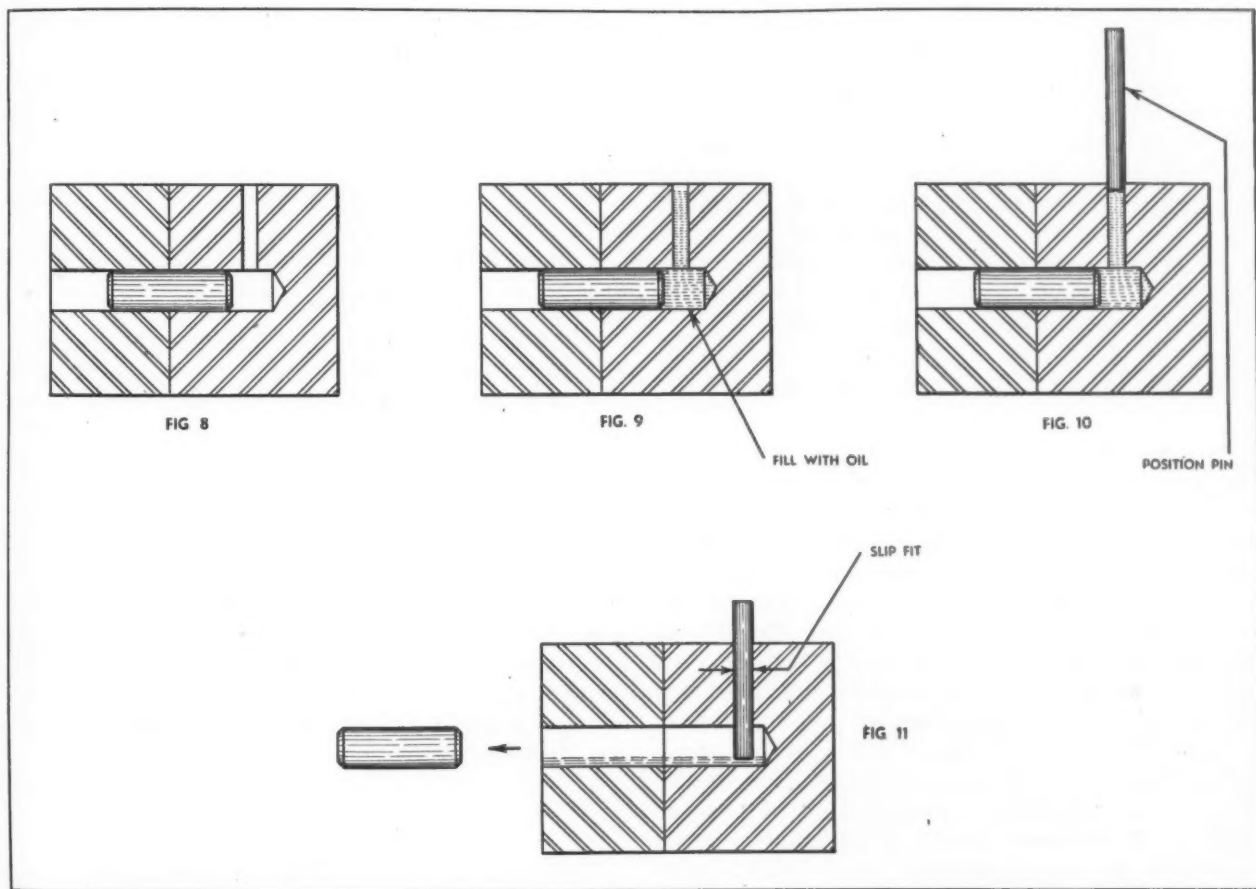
Parts with Semi-blind Hole Positioned for Removing Pin. Fig. 9. Cavity in Back of Dowel-pin Filled with Oil. Fig. 10. Rod in Position for Compressing Oil to Remove Dowel-pin from Hole. Fig. 11. Dowel-pin Removed from Semi-blind Hole by Hydraulic Pressure
